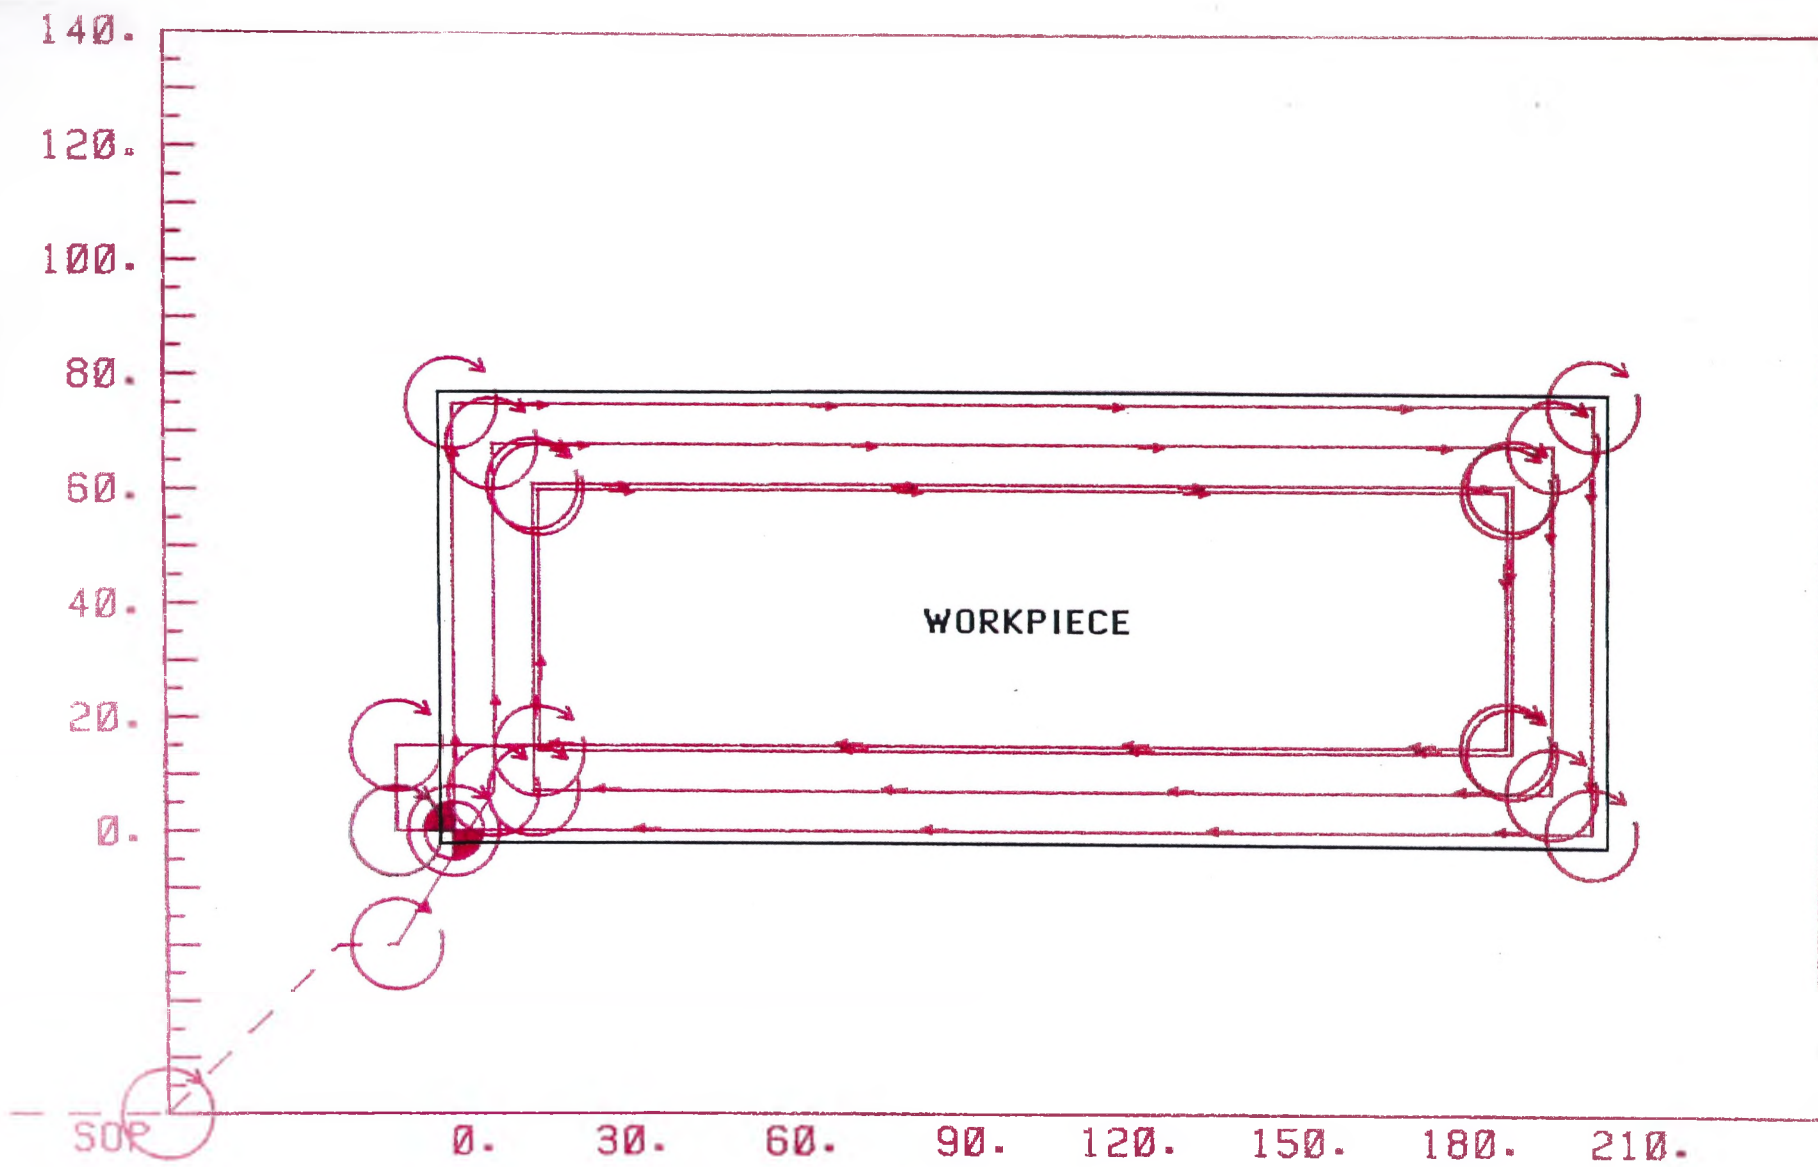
Tool Path of  $\phi$  16 mm End Mill.
